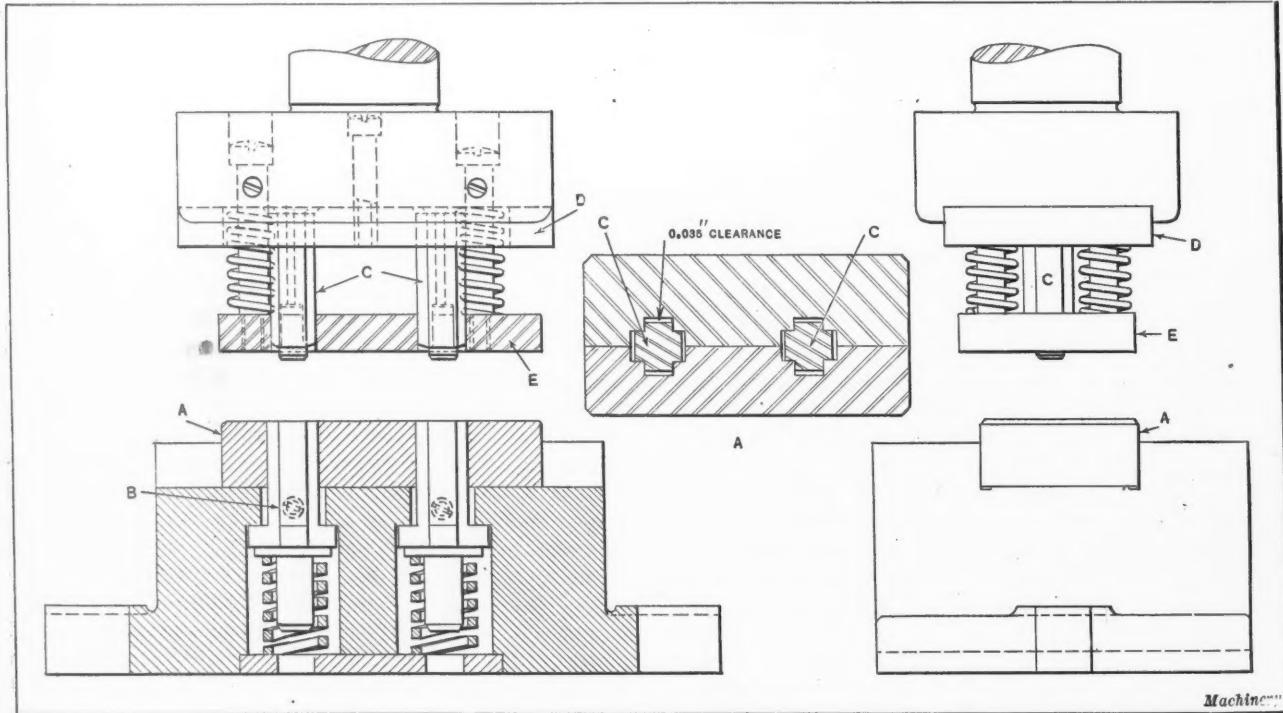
Shearing and Lug-forming Dies, also of Built-up Construction
